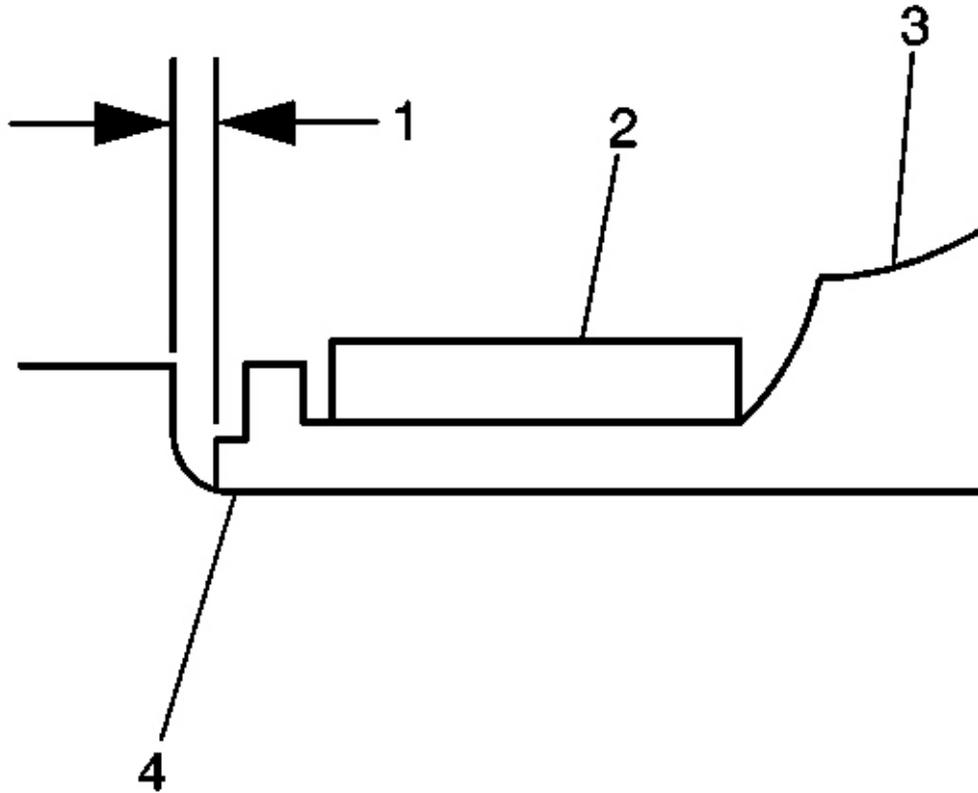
Positioning The Seal And Large Retaining Clamp To The Joint Outer Race
